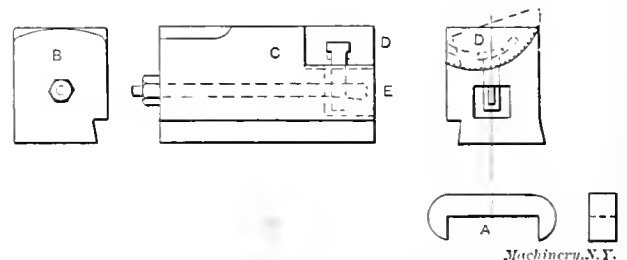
Adjustable Lower Die for Drawing and Finishing Tapers
